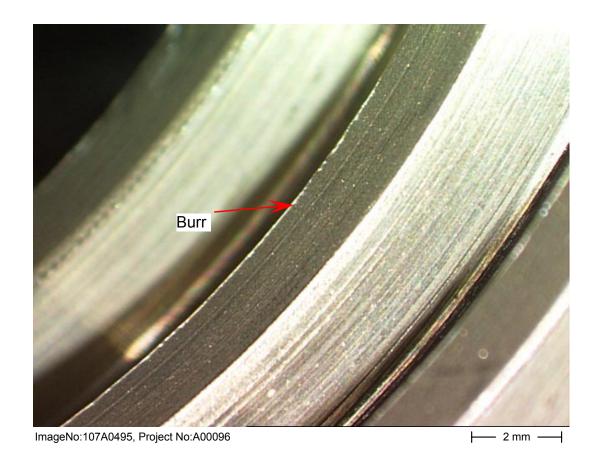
Looking into the interior of Acme nut D-3351 showing the burr at the minor diameter of the lower thread flank.
